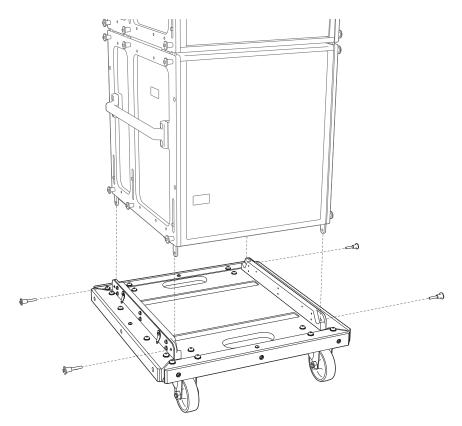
MCF-750 Caster Frame with 750-LFC Stack, Exploded View
